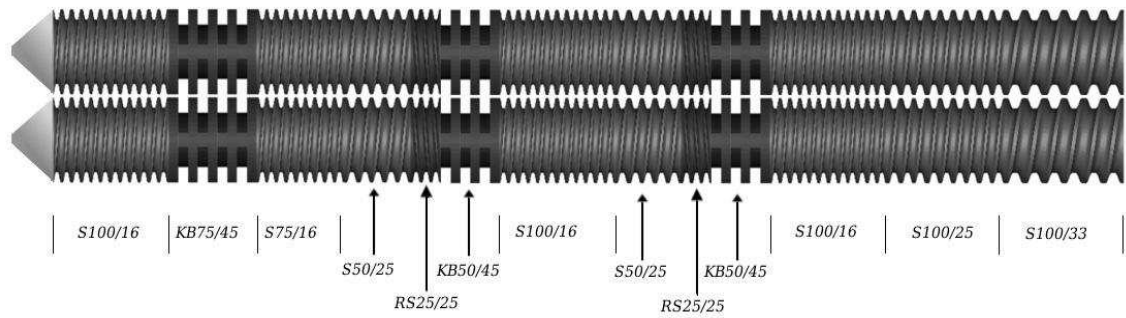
Screw profile used in reactive extrusion. S: Screw; RS: Reverse Screw; KB: Kneading-Block (total length in mm/thread in mm)
